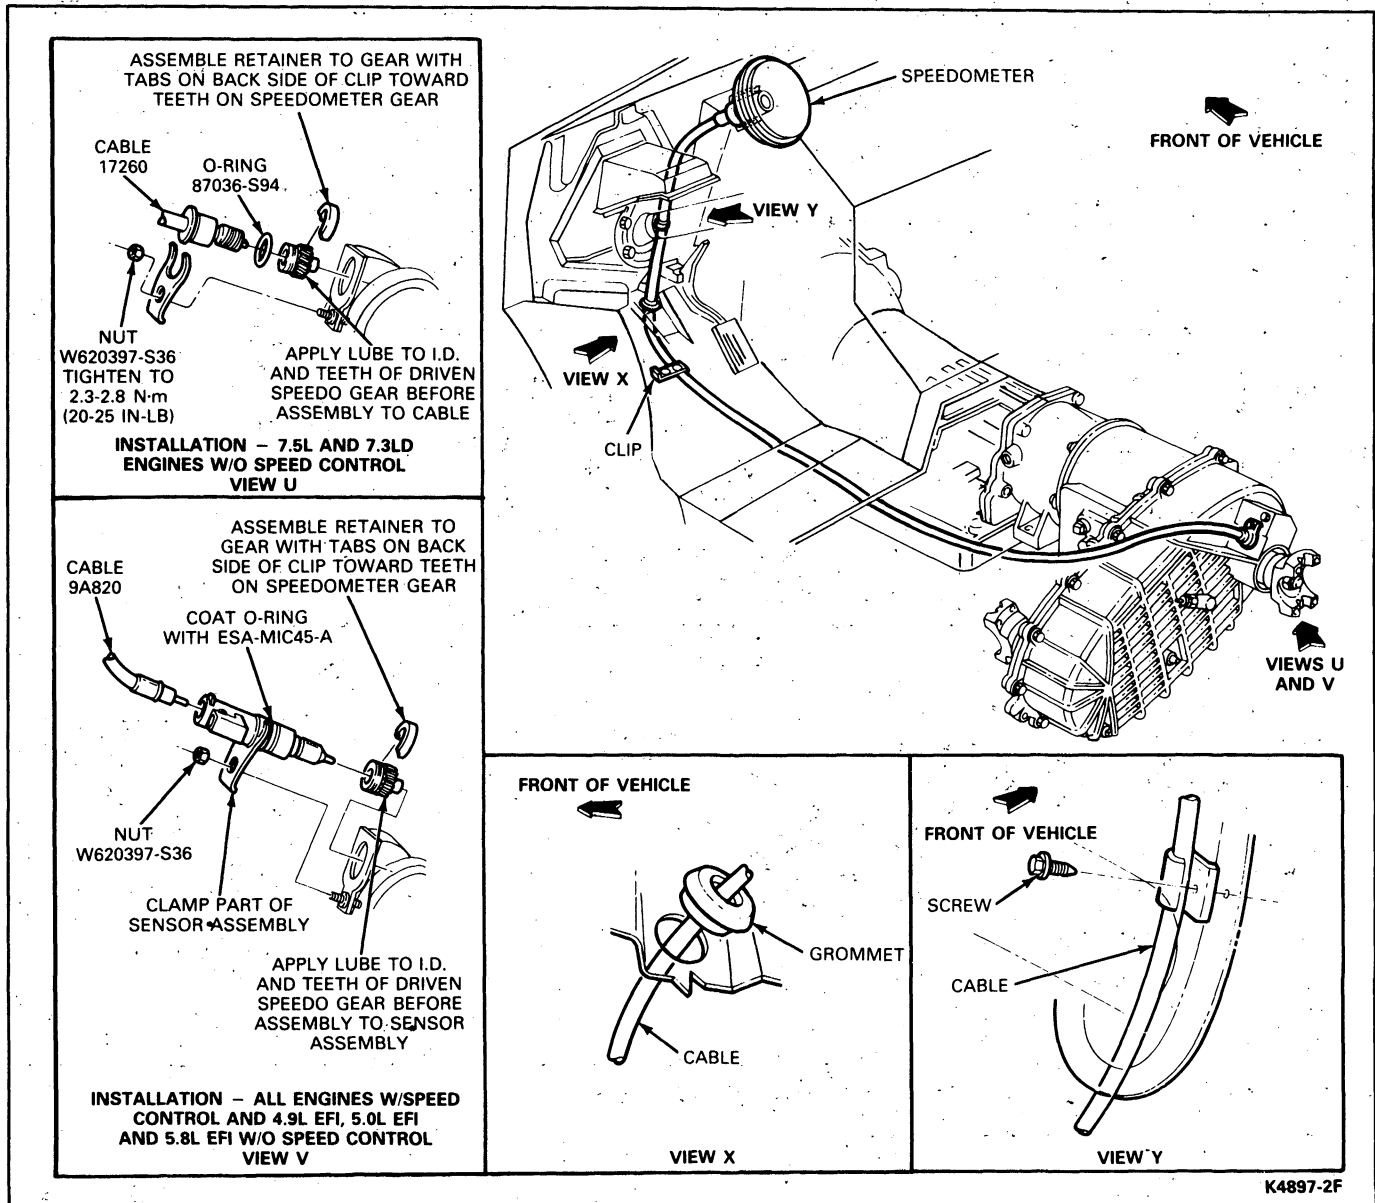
F-150—F-350, F-Super Duty and Bronco Speedometer Cable Installation (4X4)
